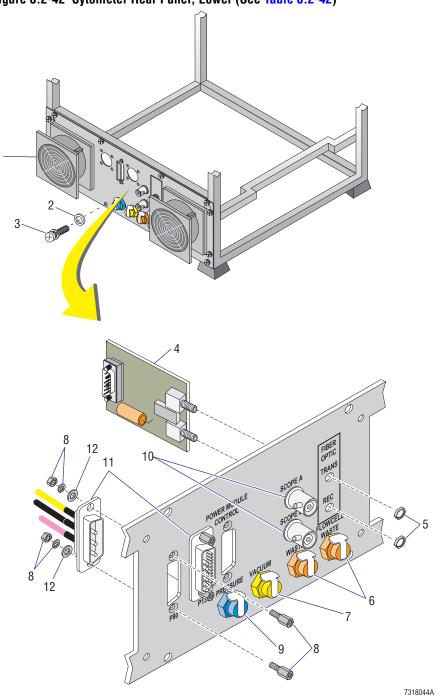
Cytometer Rear Panel, Lower (See Table 8.2-42)
